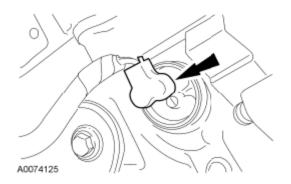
Locating Block Heater Electrical Connector Courtesy of FORD MOTOR CO.
